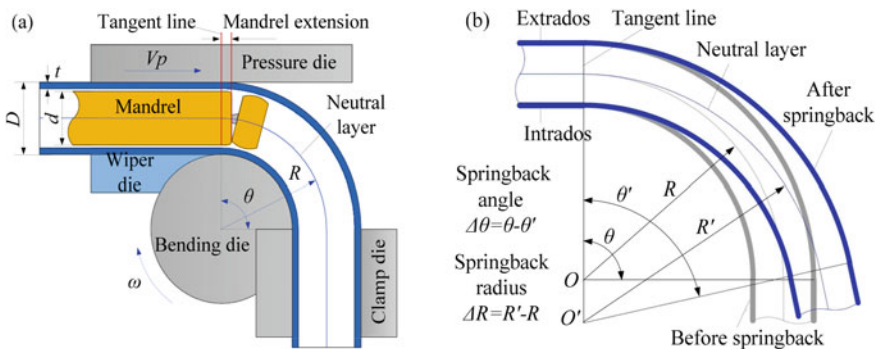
Schematic view of rotary draw bending: a forming principle and tooling system; b unloading springback. (Color figure online)
